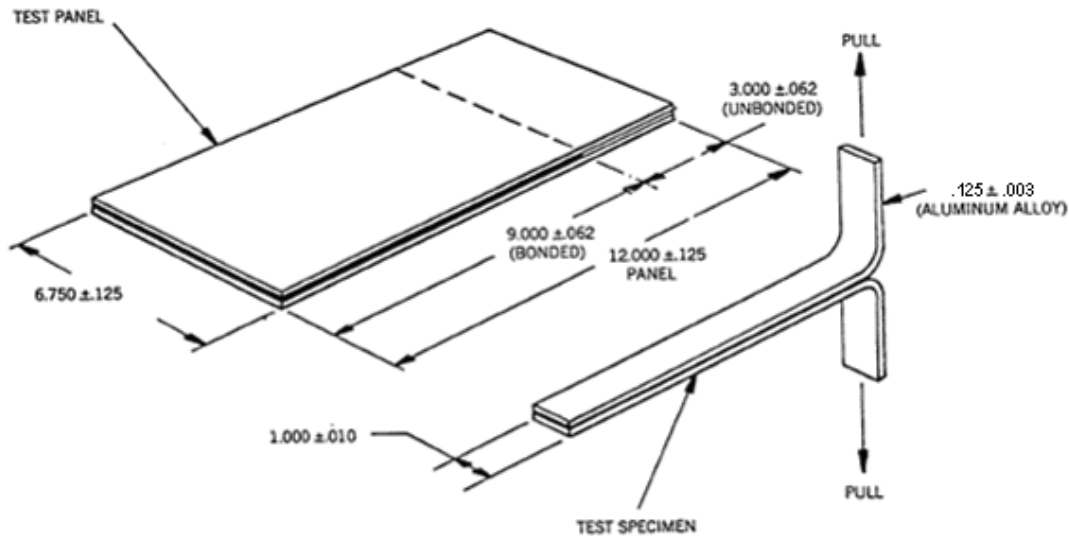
ASTM D1876 T-Peel Tension Test Specimen.
